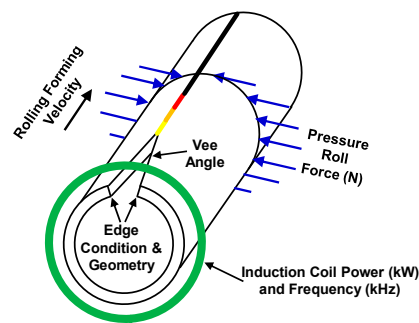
A schematic of the process parameters involved in induction seam welding.
